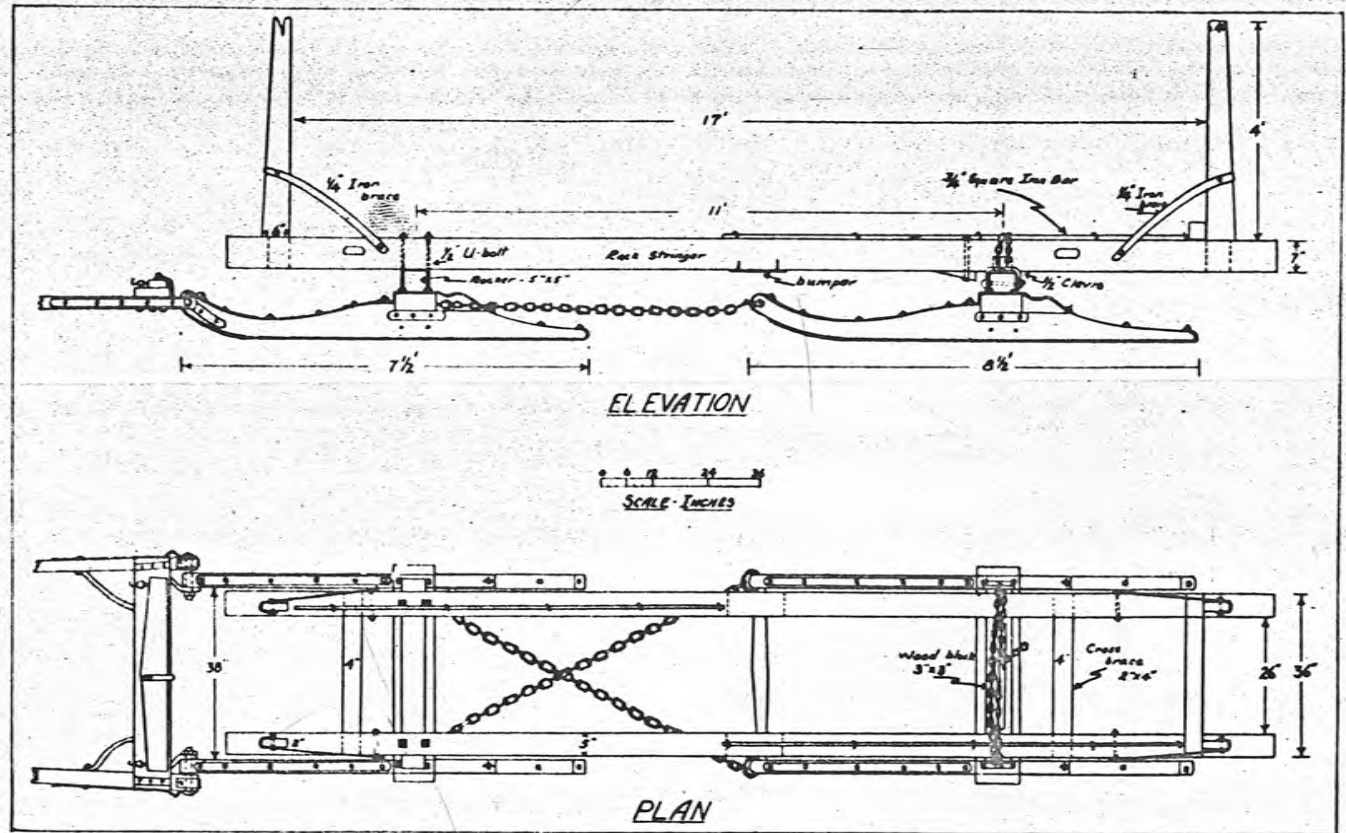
Plan and elevation of sleigh with typical rack for four-foot wood.
